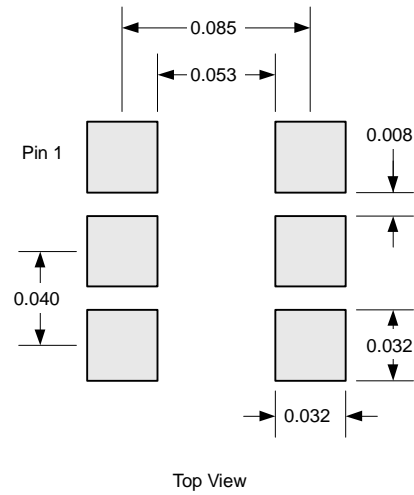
THS9001 Recommended Footprint (dimensions in inches)
